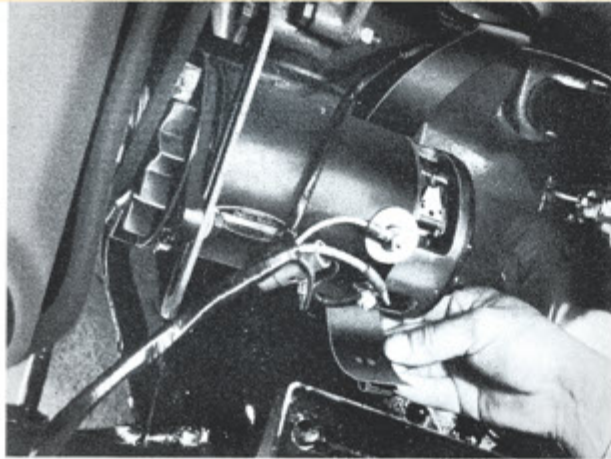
Inspecting the Generator and Cover Band for Thrown Solder
